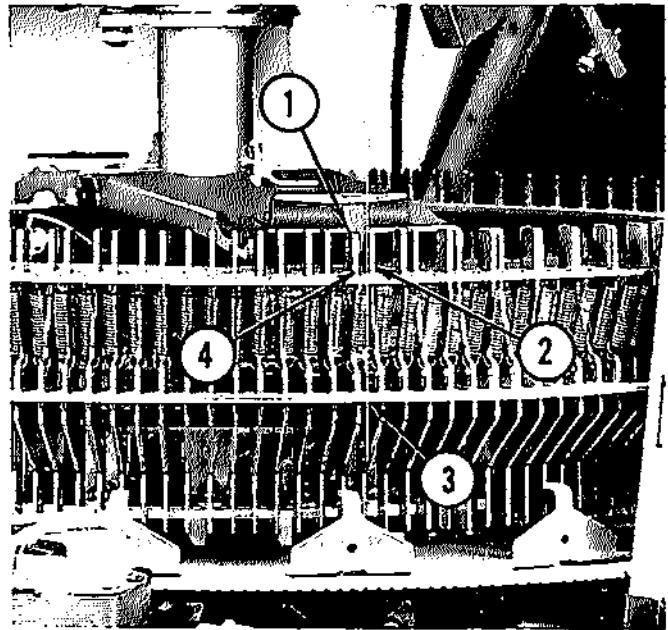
ELECTRIC SELECTOR ADJUSTMENT - 2600
